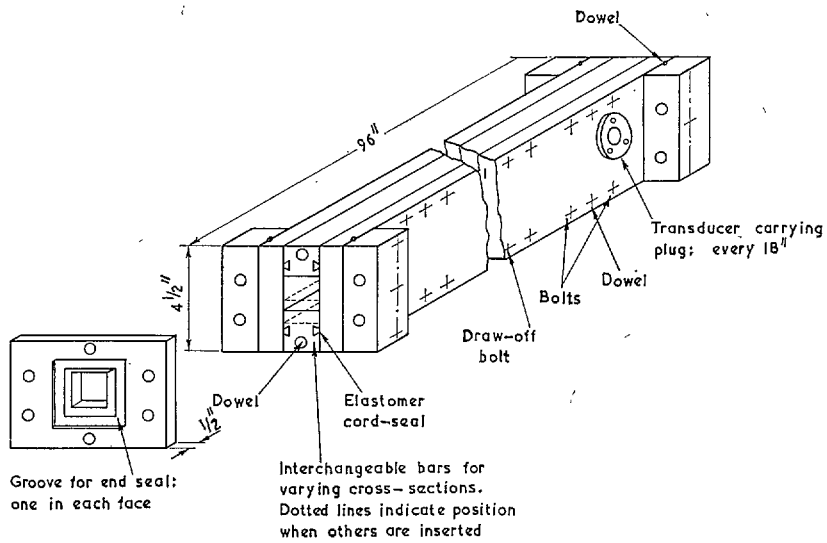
The rectangular-bore shock tube, one length is shown illustrating the vacuum seals and the coupling plate.
